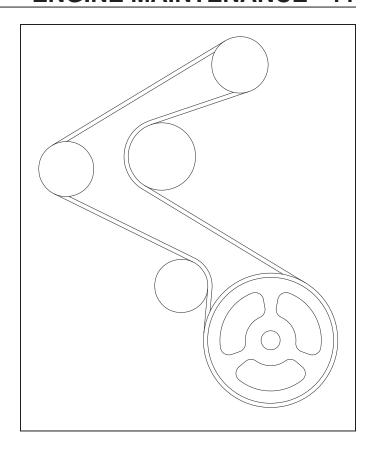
B 6.2L Supercharger Drive Belt Configuration
